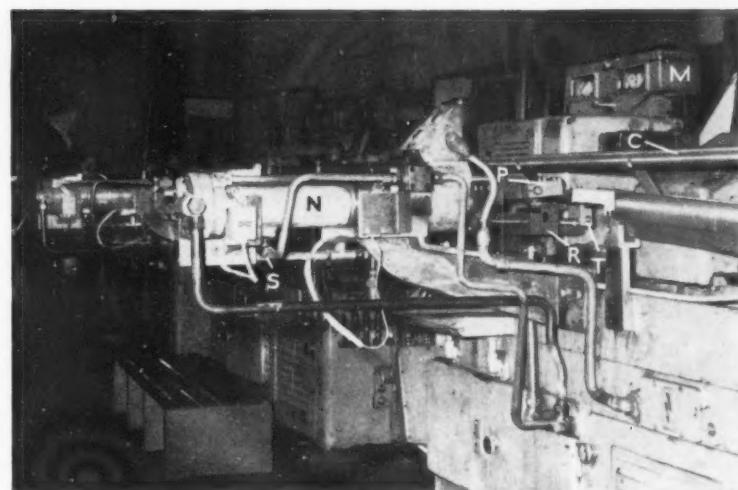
Close-up View of the Second Ordzonikidze Copy-turning Lathe in the Shaft Machining Line, Showing the Automatic Loading and Unloading Mechanism and the Turn-round Unit
